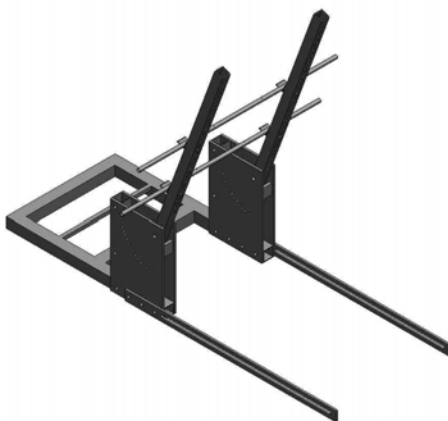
Basic Positioning Rig Concept Developed in Canada and used in Canada and the United States. (Sketch Courtesy of Med-Eng Systems, Canada)
